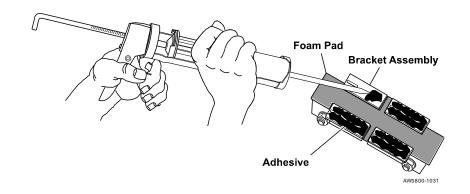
Applying Adhesive to the Bottom of the Bracket Assembly
